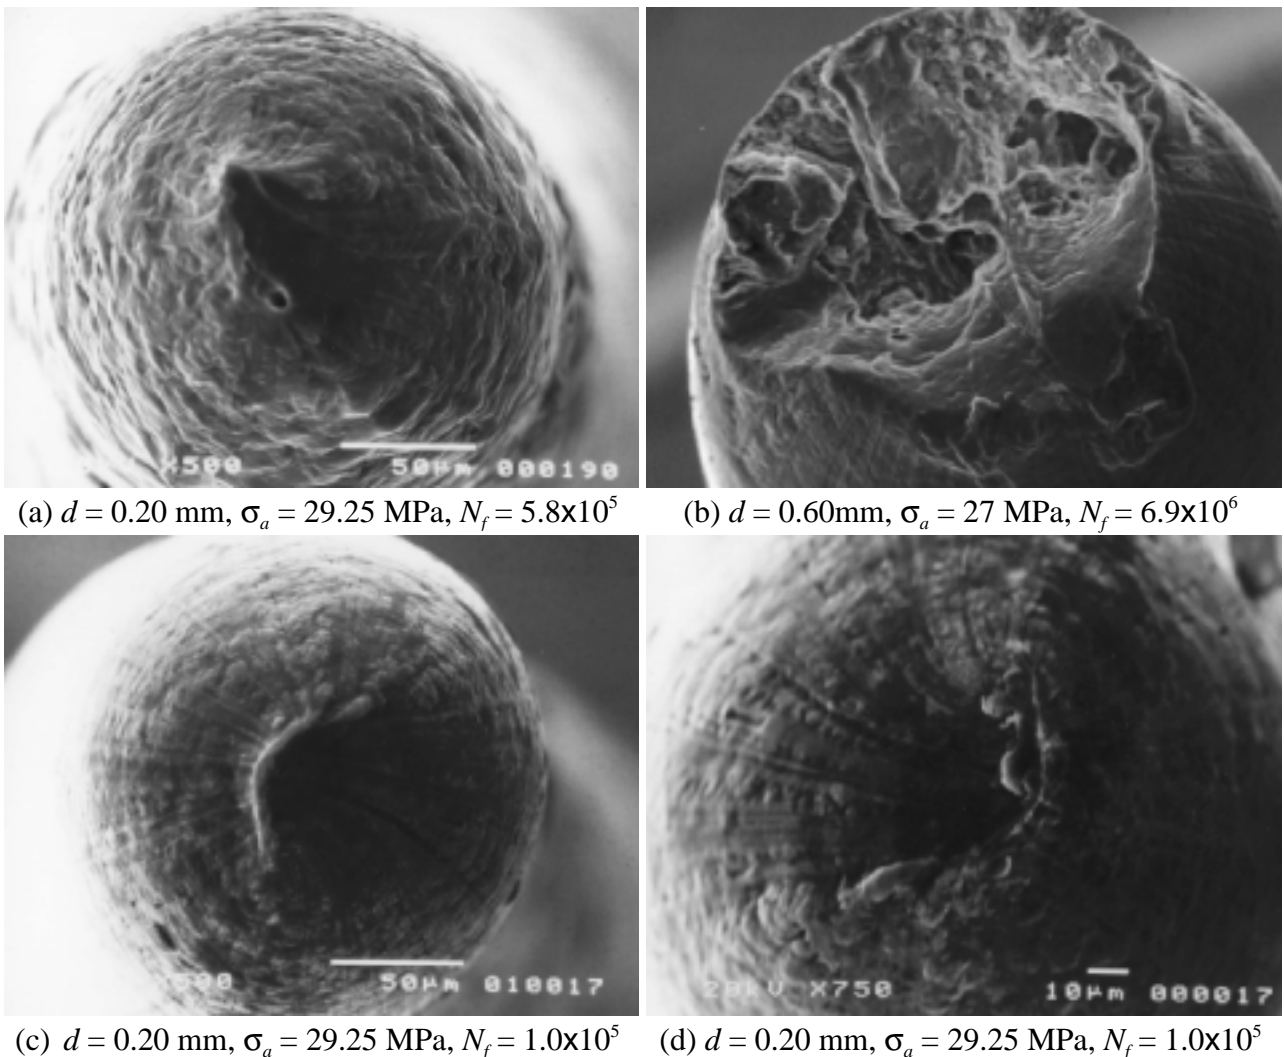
Fracture surface of commercially pure aluminum.
